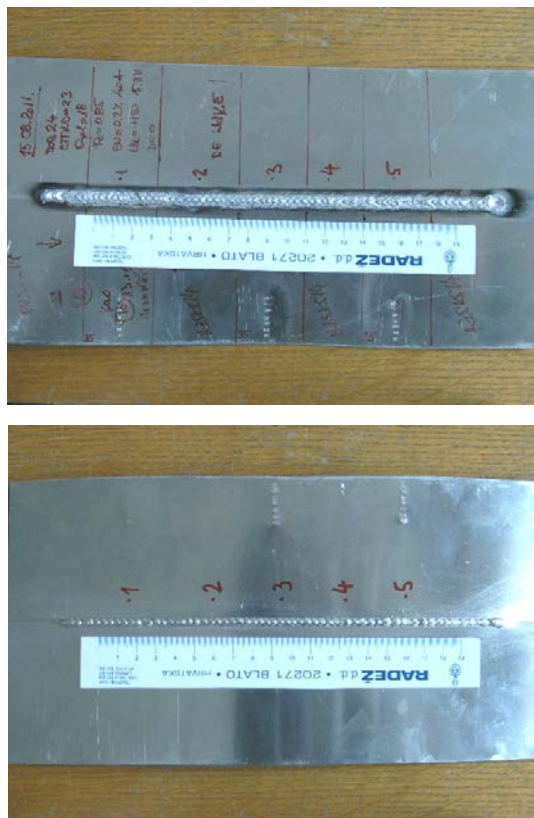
Example of a welded joint by MIG welding in short - circuit mode, experiment 5
